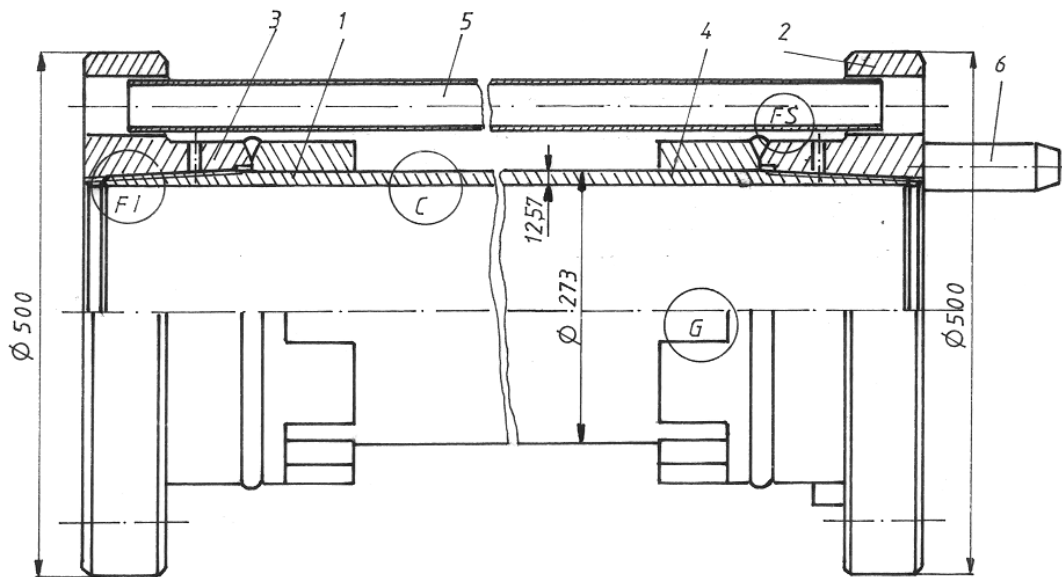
Longitudinal section through a 10 $\frac{3}{4}$ in drill pipe with airlift pipes: 1 – drill pipe body; 2 – flange; 3 – flange neck; 4 – crenellated collar; 5 – airlift pipe; 6 – centering bolt
